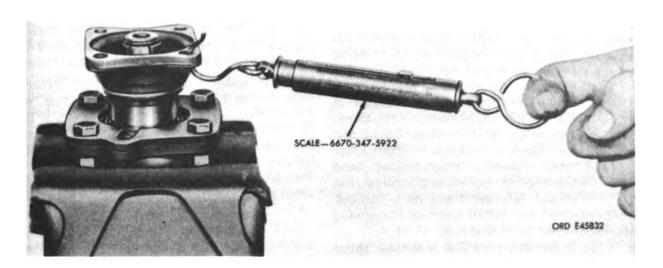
Checking preload of drive pinion using scale—8670-347-5922.
